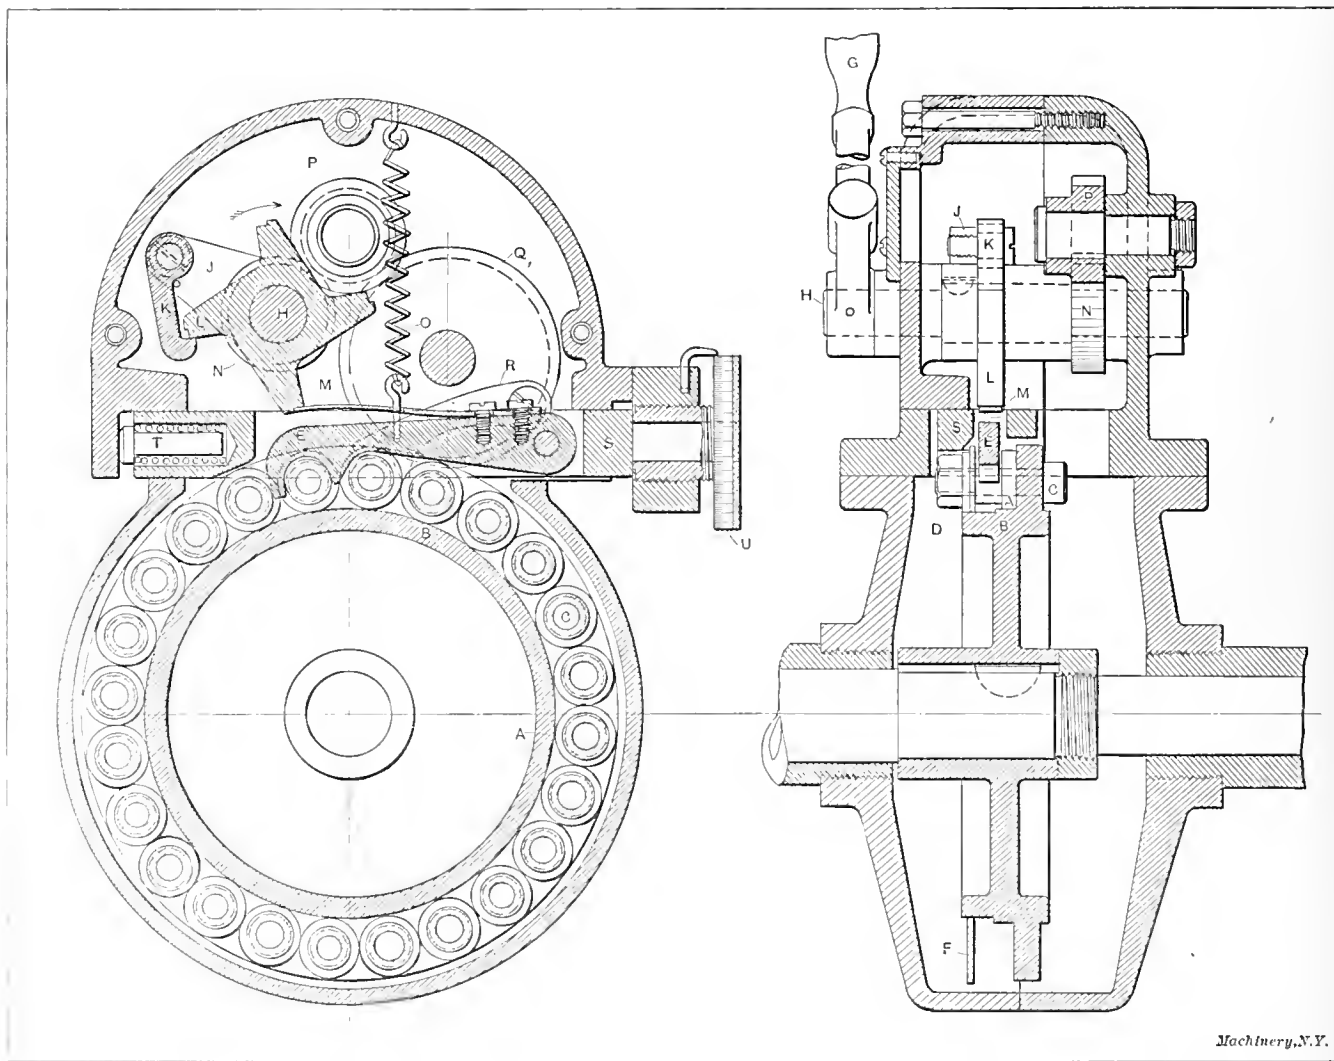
The Indexing and Feeding Mechanism of the Fellows Gear Cutter Grinding Machine, in which the Dividing Wheel is used
